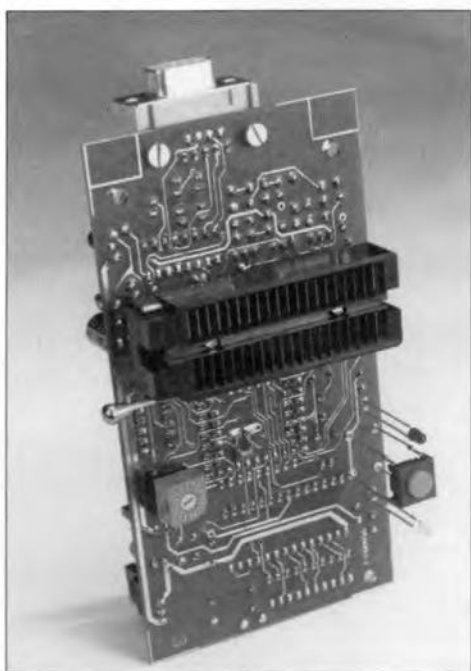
View of the solder side of the board which holds, among other components, the 40-way ZIF socket.
